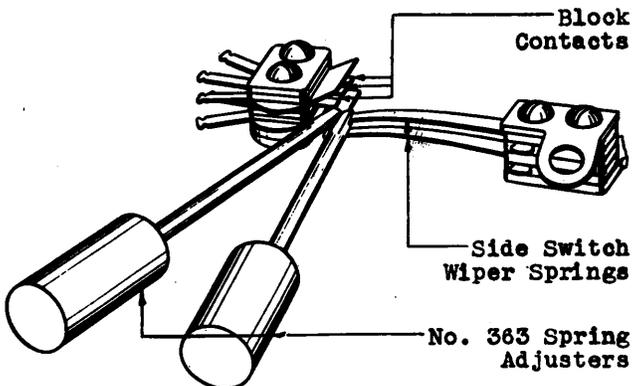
Method of Adjusting the Side Switch Wiper Tips
